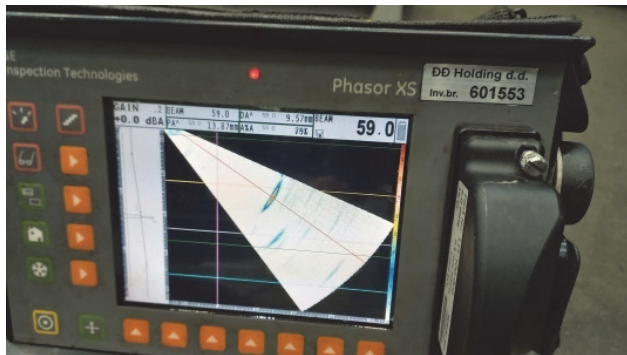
S scan of the defect in the filled area of weld no. 1
